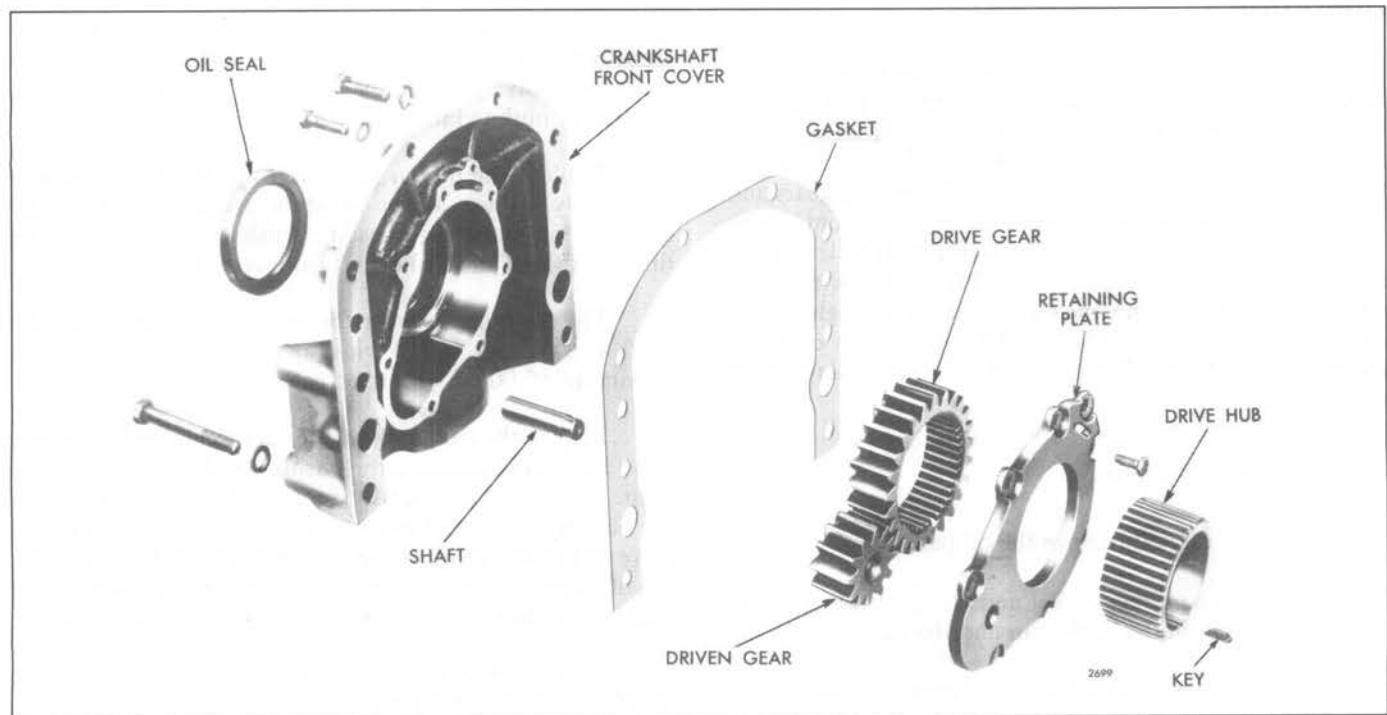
Lubricating Oil Pump Details and Relative Locations of Parts (6V-92 or 8V-92 Engine)
